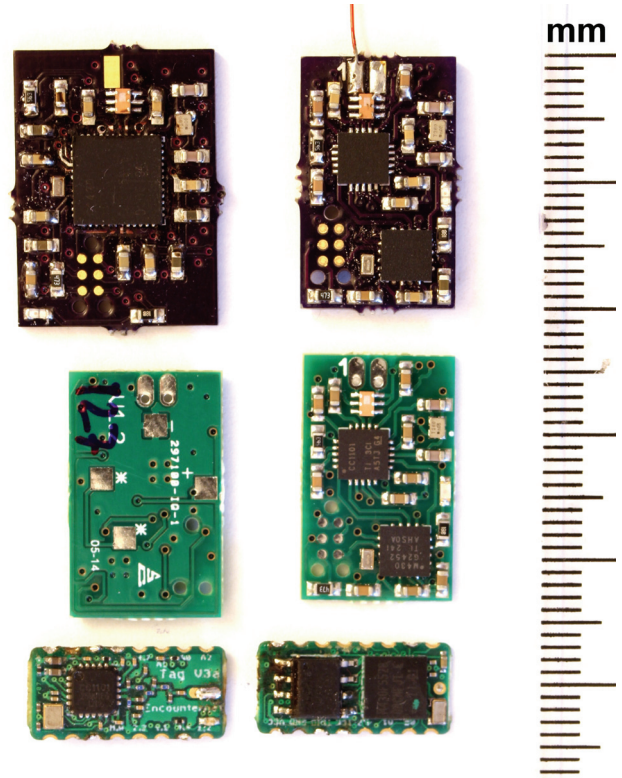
Hand-assembled prototype tags (top row, a 22-by-16mm CC430-based tag on the left and a 19-by-12mm CC1101-based tag on the right) our production tags (middle row, both sides shown, same layout and size as the top-right prototype), with Encounternet tags for comparison (bottom row, both sides shown, 15.5-by-7.5mm).
